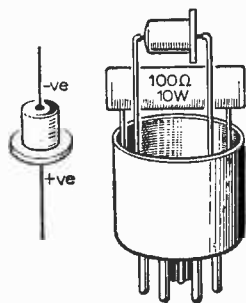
(far right): The complete unit built into an i.o. valve base.
